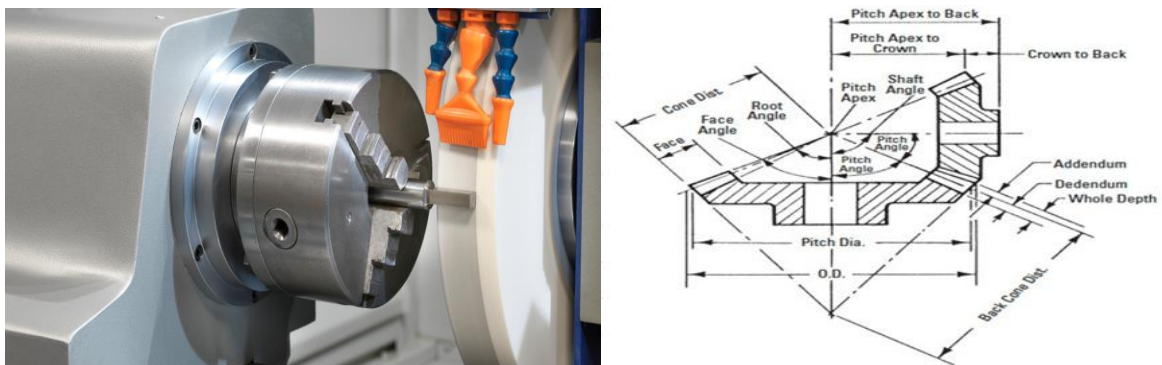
Gear Pin Grinding and turning processes and the gear tooth terminology
